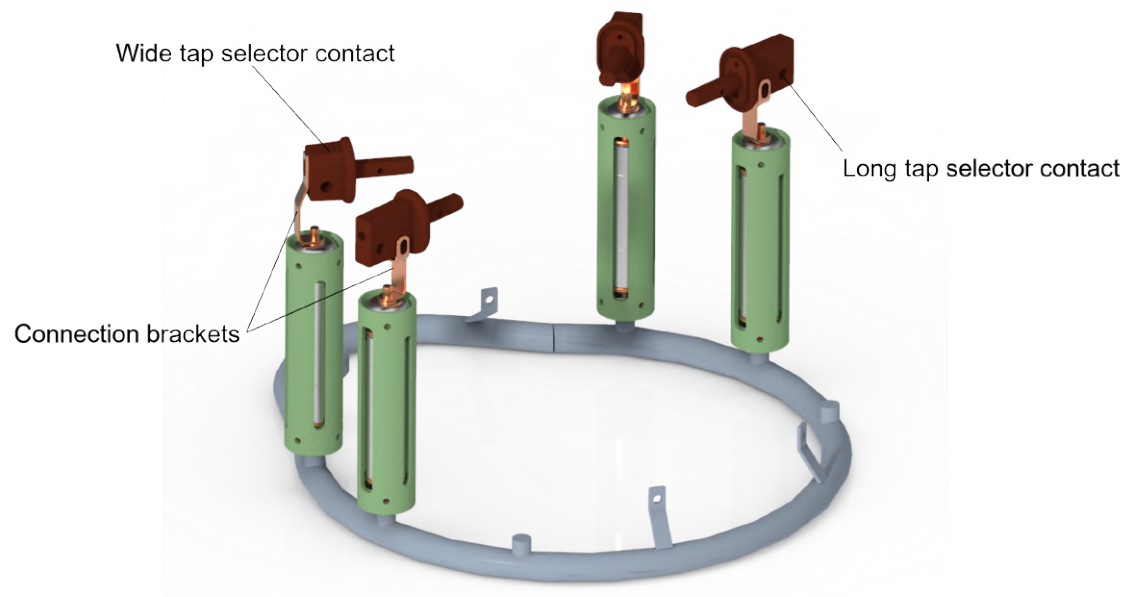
Close-up of concept "SixStanding Shieldring".
